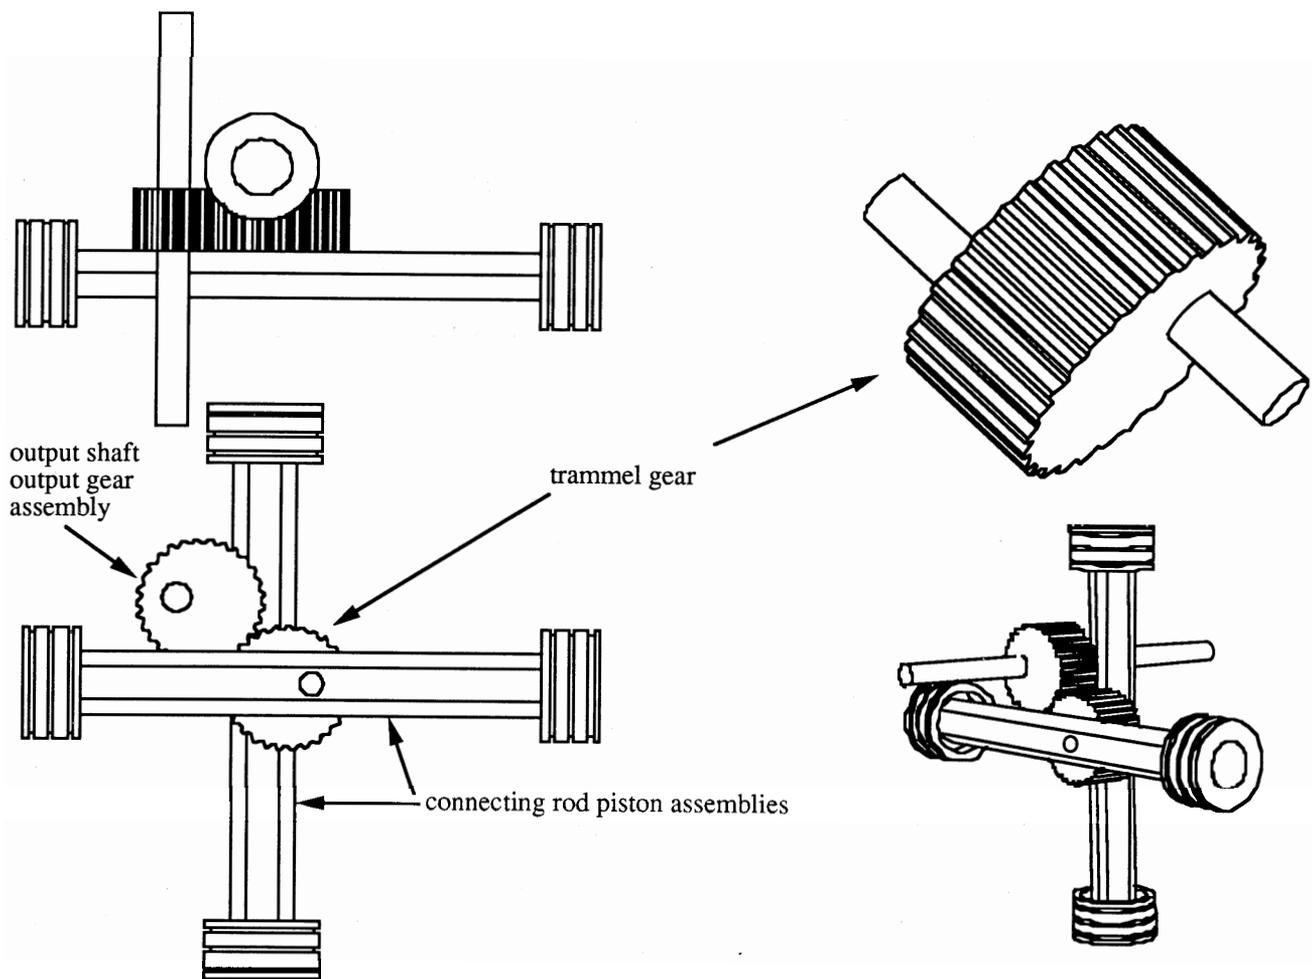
The four moving part Stiller-Smith Mechanism configured for an internal engine application.
